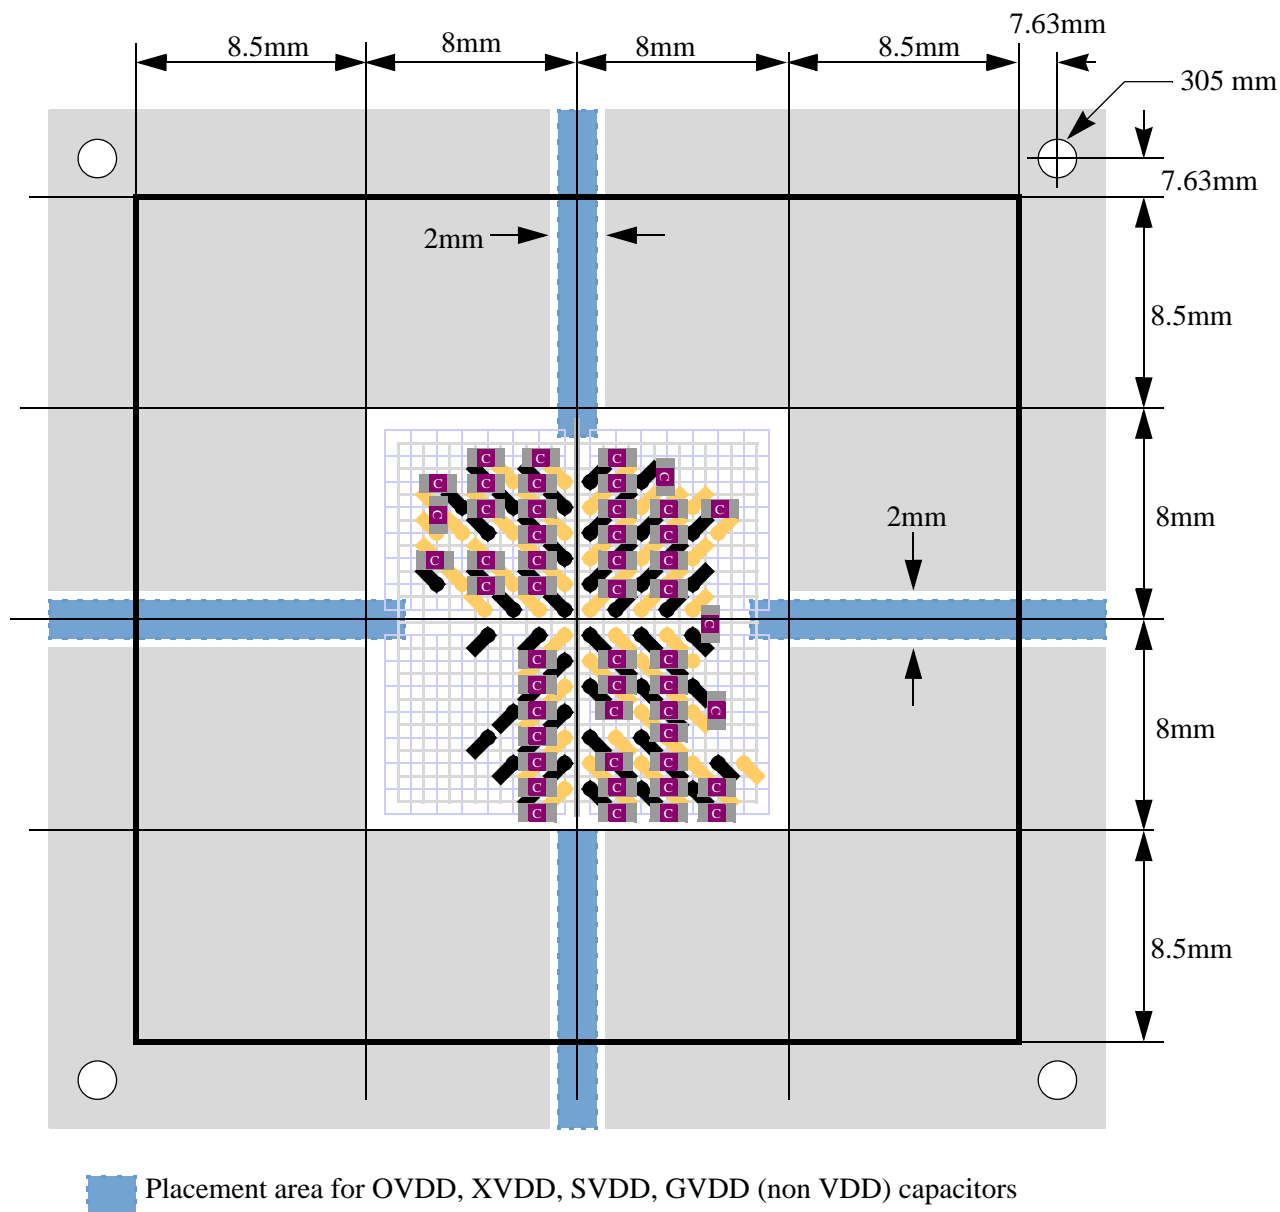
MPC8641 PCB Bottom Clearance for Socket Plate
